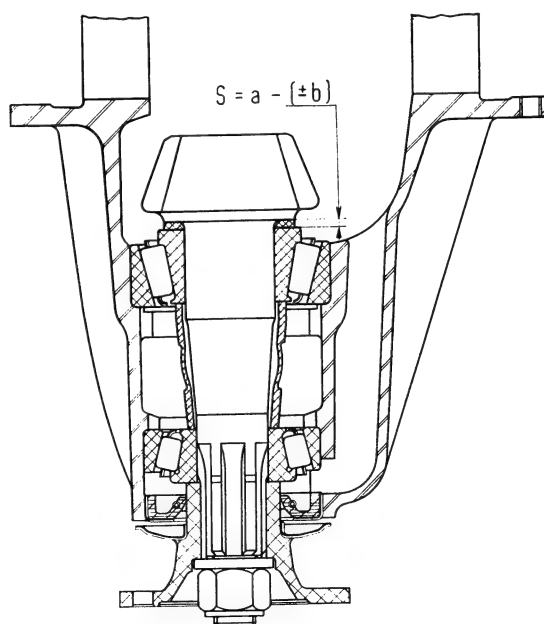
Diagrammatic view of drive pinion installation, where:
